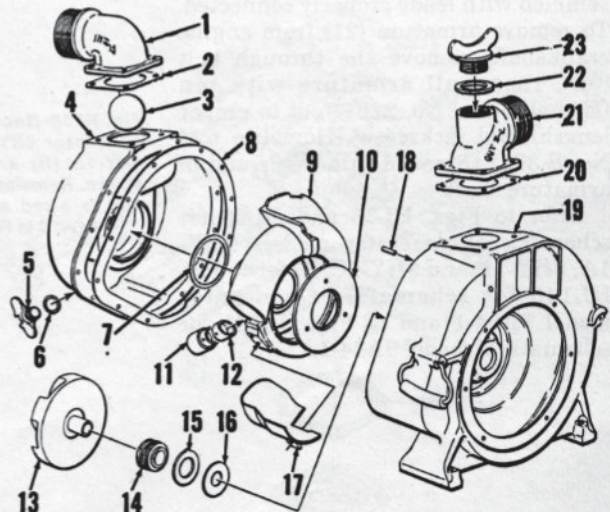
Exploded view of early type centrifugal type pump assembly. Pump impeller (13) is mounted on engine crankshaft. Pump seals (14, 15 & 16) are the later ceramic type; earlier pumps with rubber seal may be converted by installing new impeller (13). Refer to Figs. HL31 and HL32 in preceding section for views of later type pumps.
